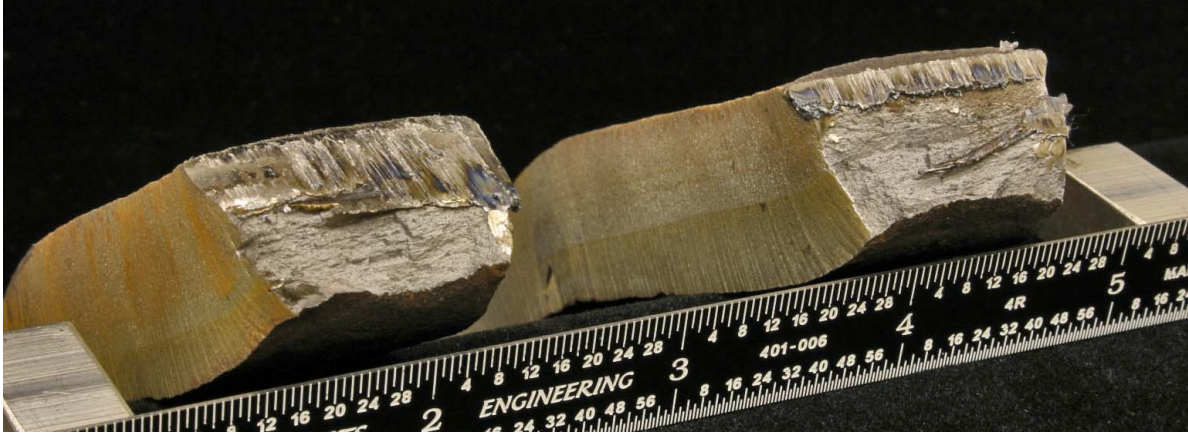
Typical BFCM fracture surfaces (sharpest top).
